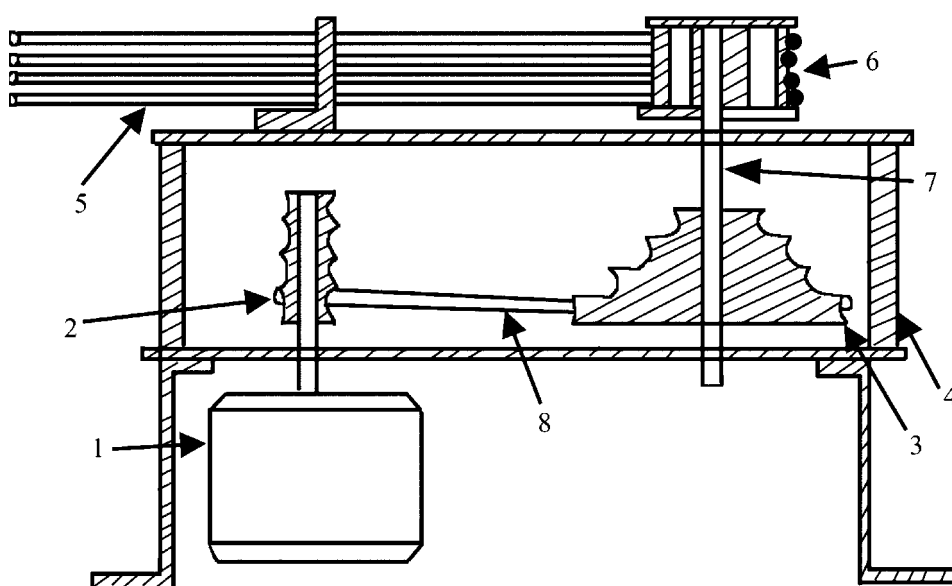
Solution pumping assembly. 1, Motor; 2, motor pulley; 3, speed control pulley; 4, frame; 5, sample plastic tube; 6, roller assembly; 7, shaft; 8, belt.
